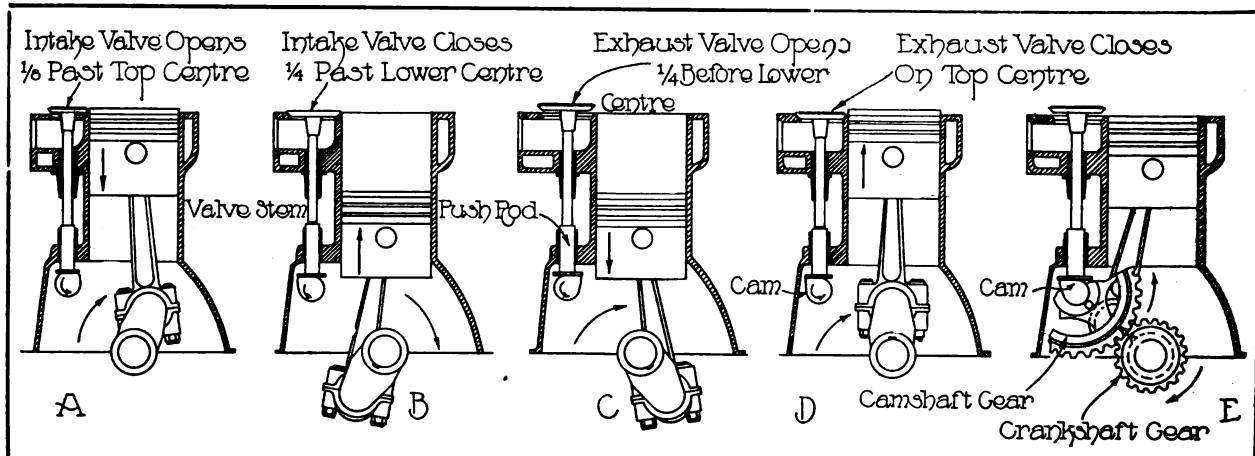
Diagrams Showing Method of Retiming the Valves and Proper Method of Replacing Camshaft—The Opening and Closing Points of Valves Are Also Outlined.
